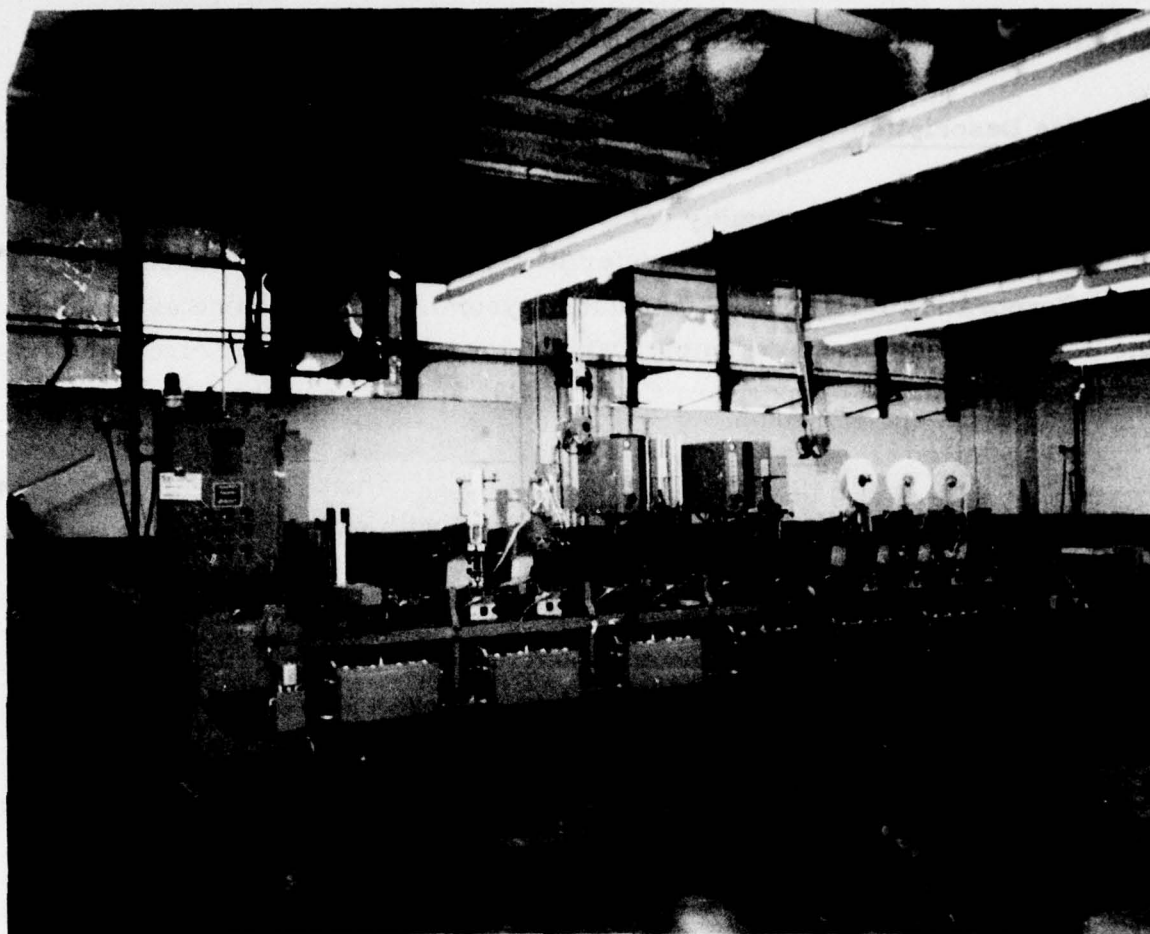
Machine No. 21A - Electronic Assembly Component Inserter
